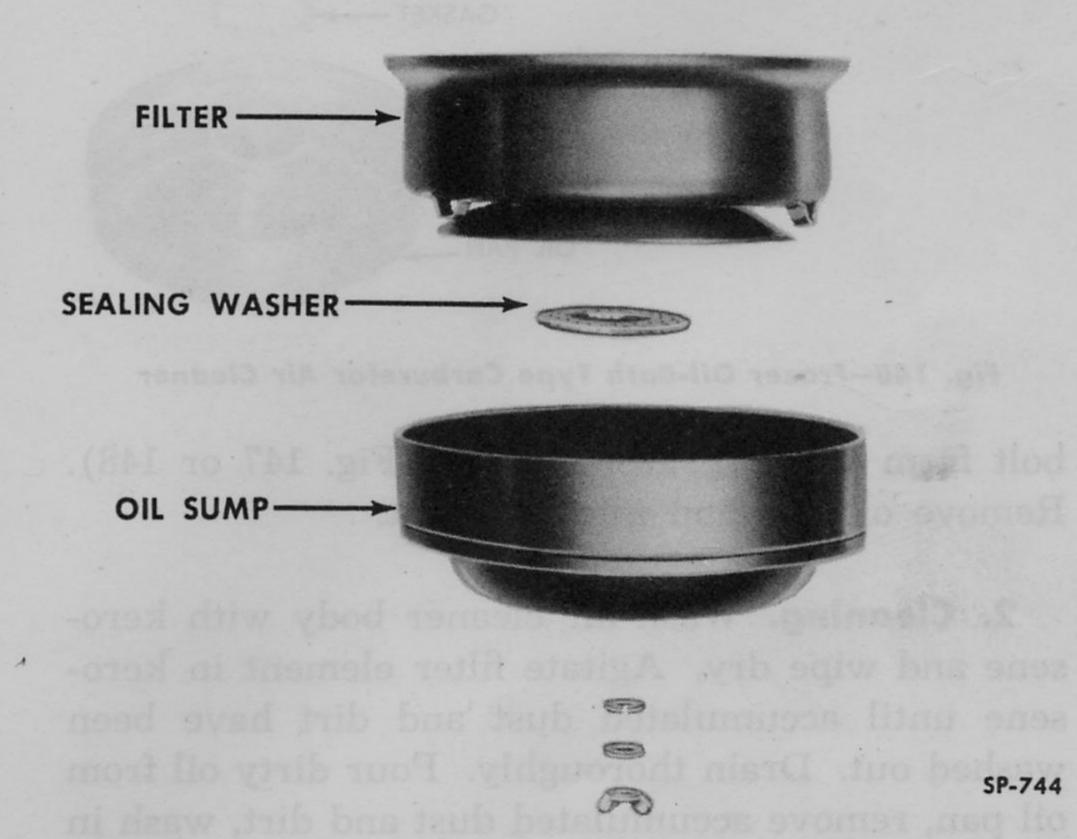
Kaiser Oil-Bath Type Carburetor Air Cleaner
